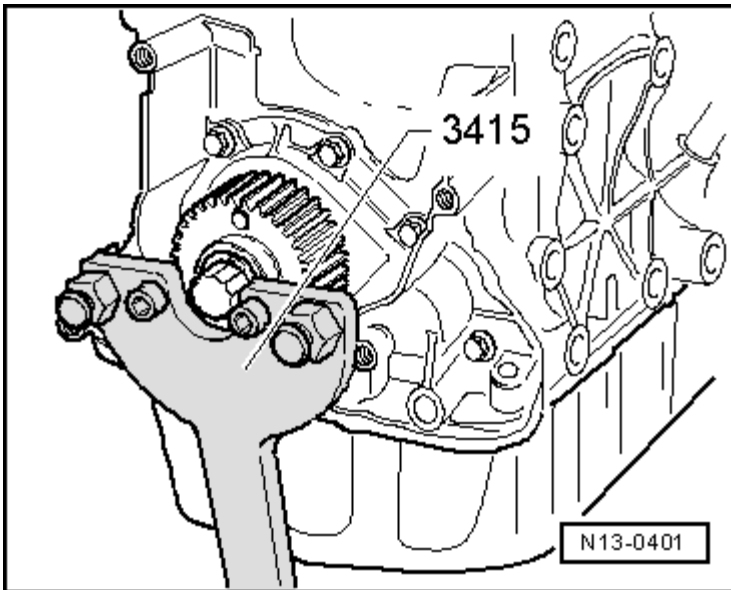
Identifying Counter-Hold 3415 On Crankshaft Toothed Belt Sprocket
